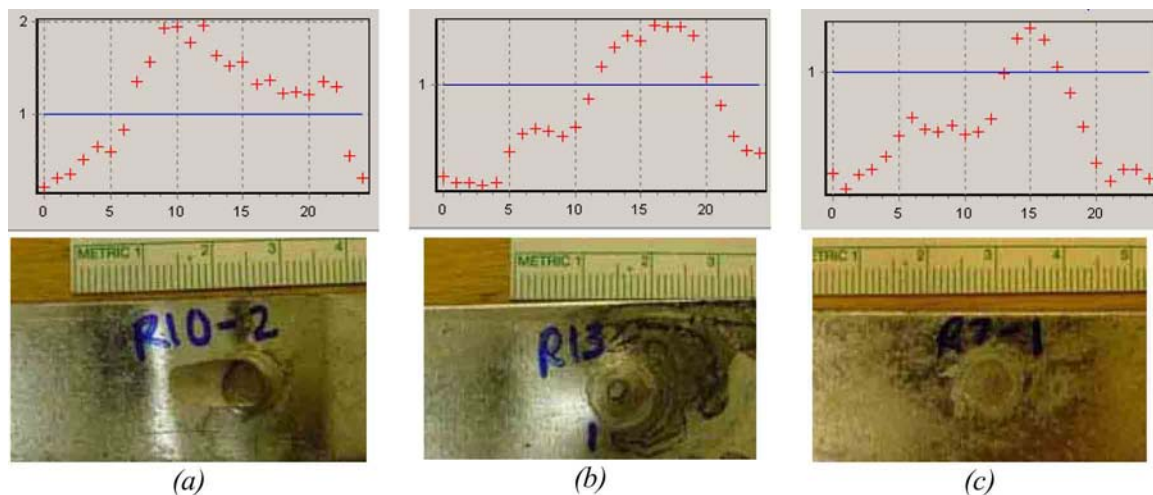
Fourier peak ratios (top row) and pictures of the peeled specimens (bottom row) for a satisfactory weld (a), an undersized weld (b) and a defective weld with no visible button (c).
